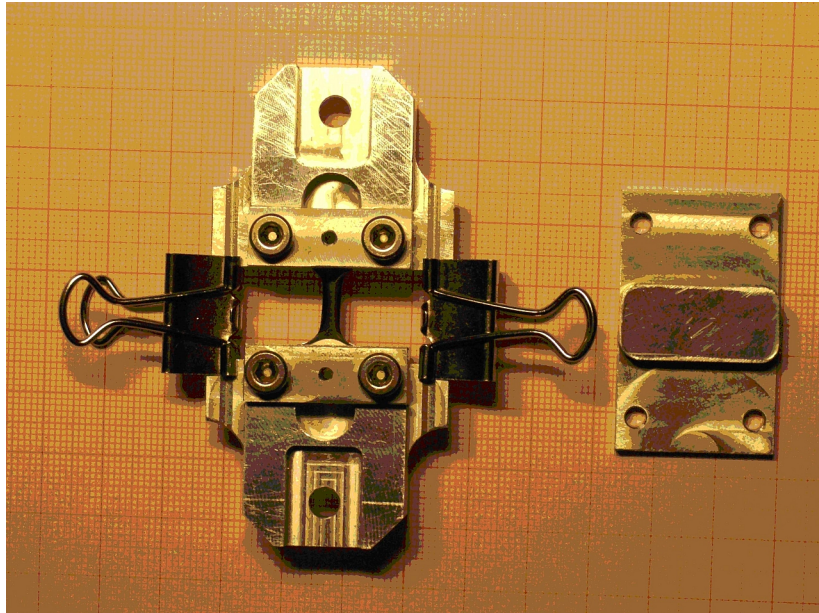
The special thin film sample clamping for mounting and tensile testing of delicate thin films.
